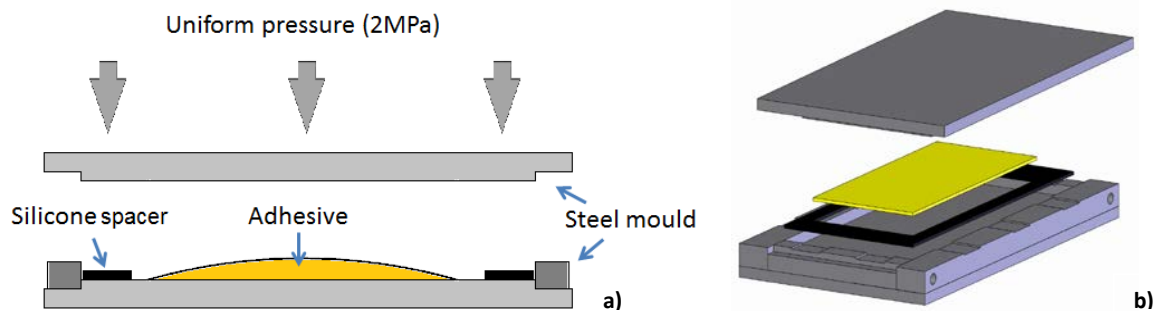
Representation of the technique used to manufacture bulk specimens: a) schematic and b) design
